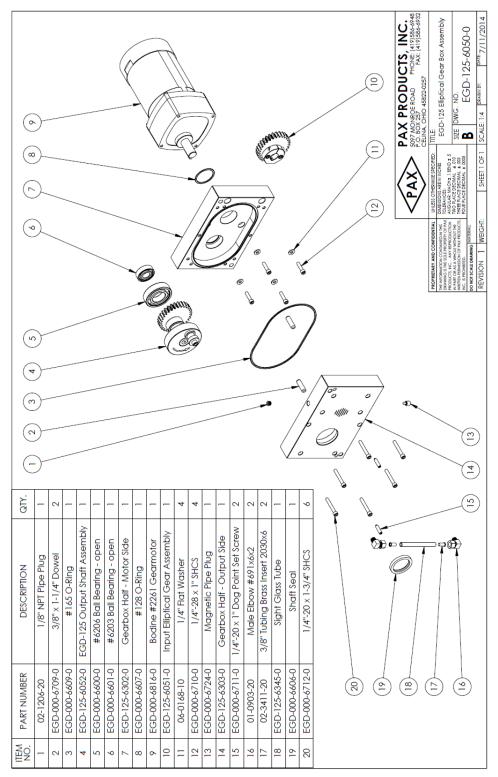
EGD-125 240 VAC 3 PHASE POWER GEARMOTOR ASSEMBLY
